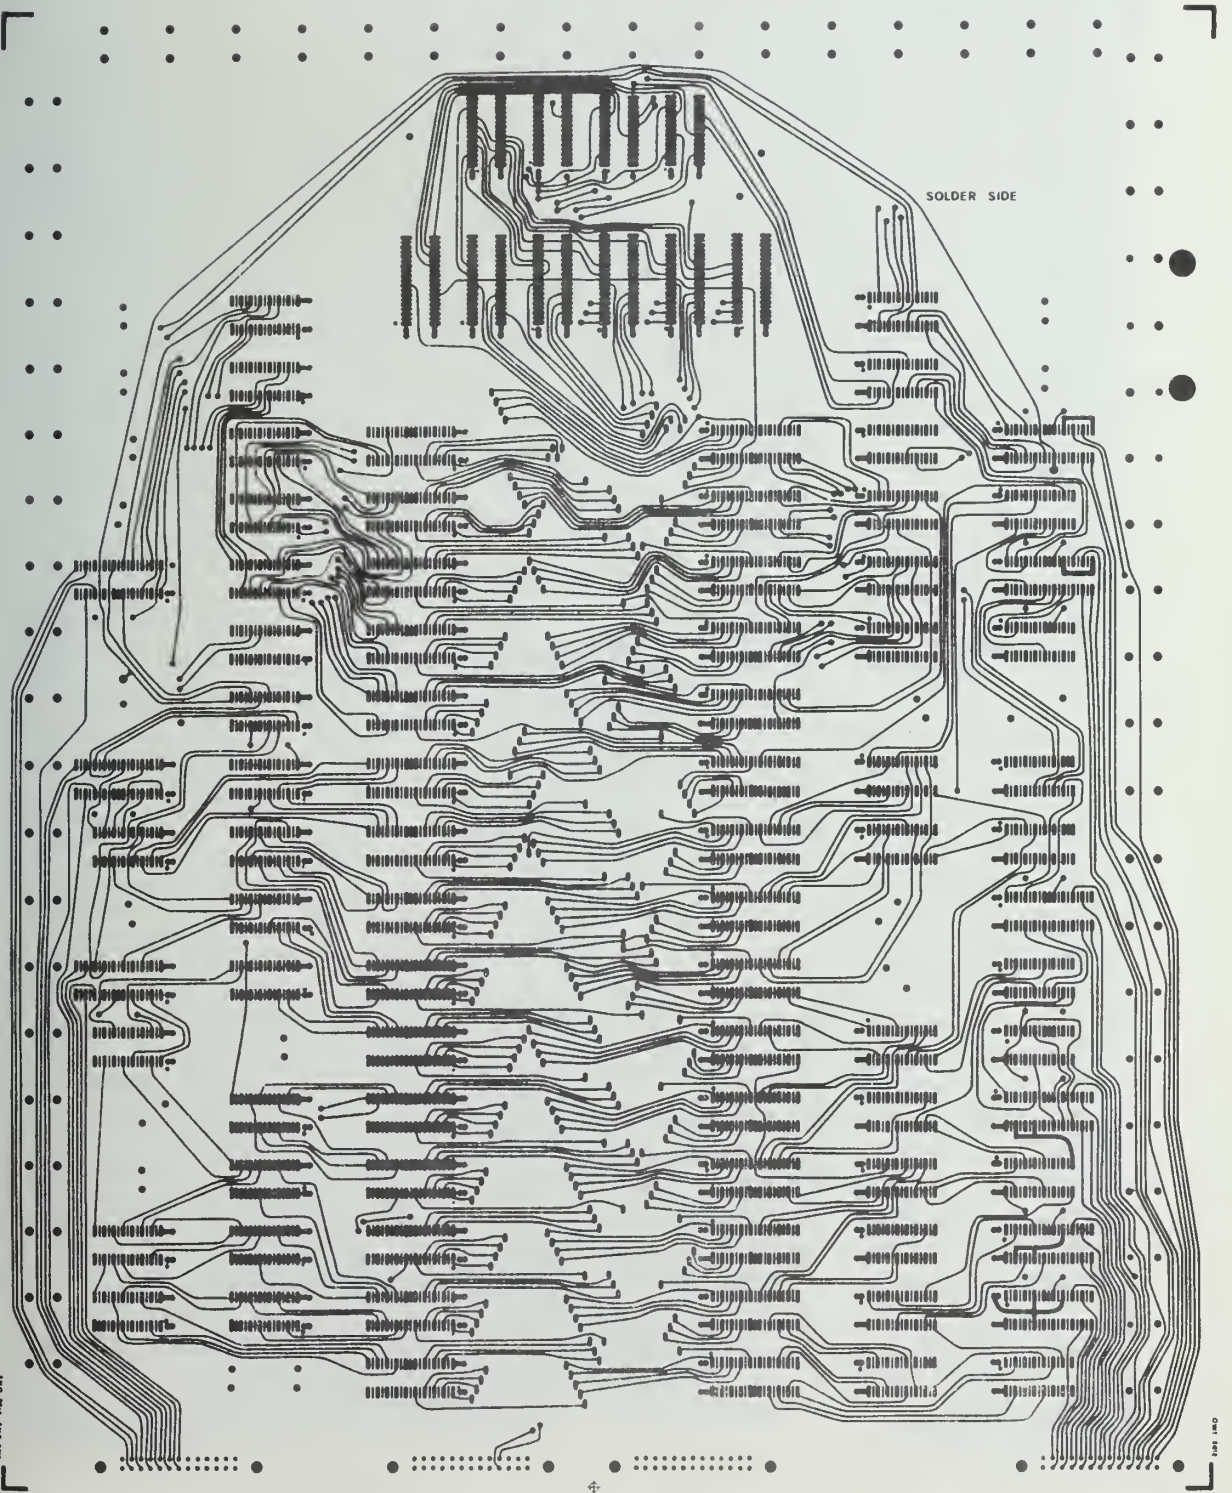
Multiplier Prototype Board, Solder Side
